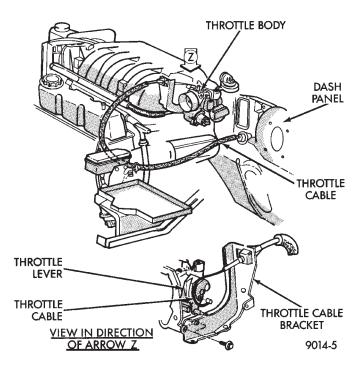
Throttle Cable Attachment to Throttle Body Attachment—3.3L Engine
